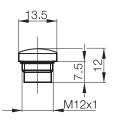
Closing cap BKS 12-CS-01 for BUS OUT
